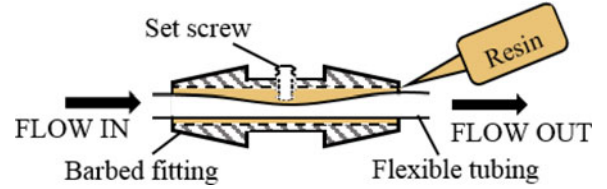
A manufactured passive valve. The process used to manufacture valves is as follows: begin with a barbed fitting compatible with actuator size; insert set screw into the fitting wall; back out set screw and insert flexible tubing; fill empty space with polyurethane resin.
